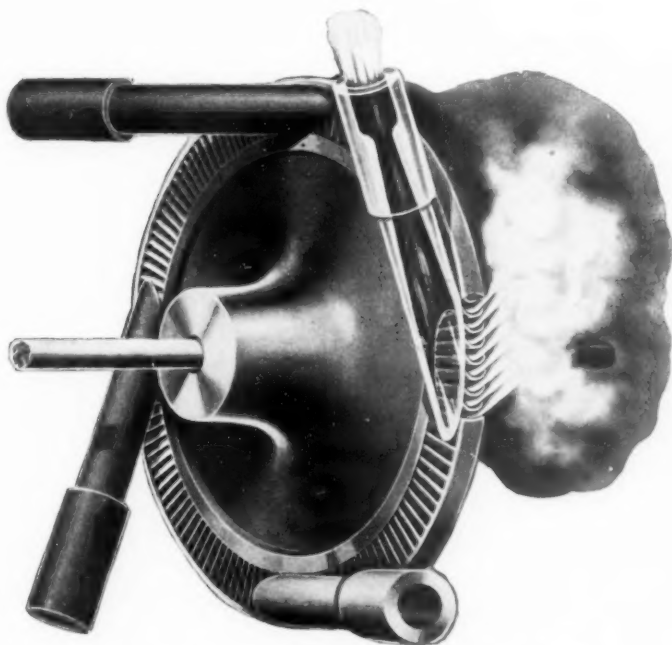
DE LAVAL WHEEL AND NOZZLE.
